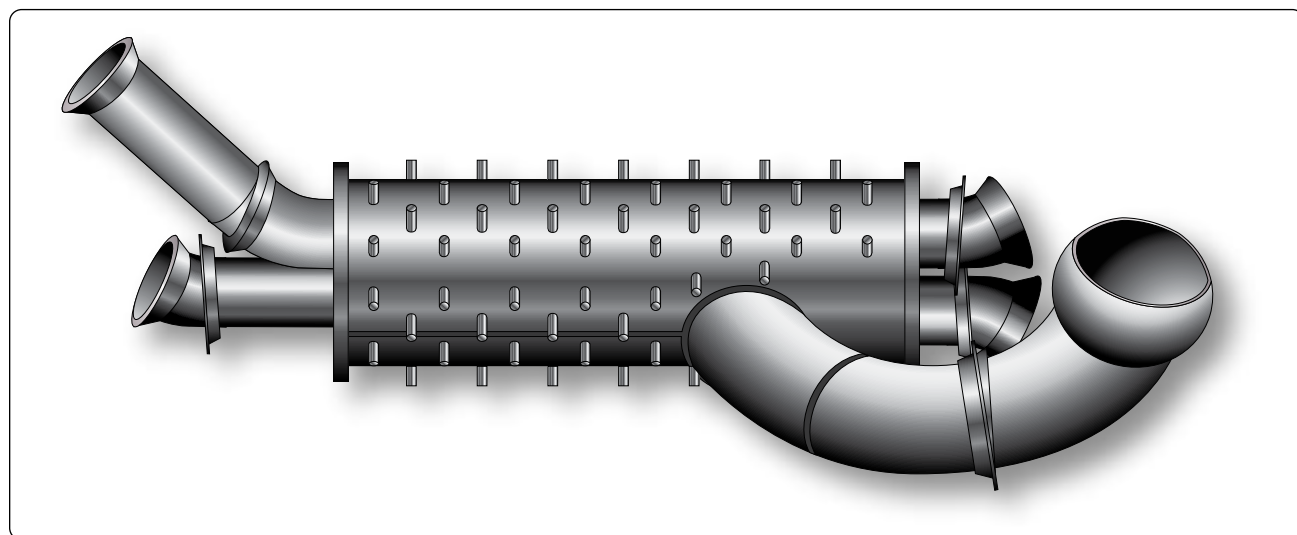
An exhaust manifold with its shroud removed showing numerous welded studs used to increase heat transfer from the exhaust to the ambient air going to the cabin.
